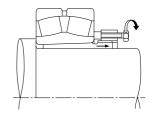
Removal of Withdrawal Sleeve Using Withdrawal Nut (2
